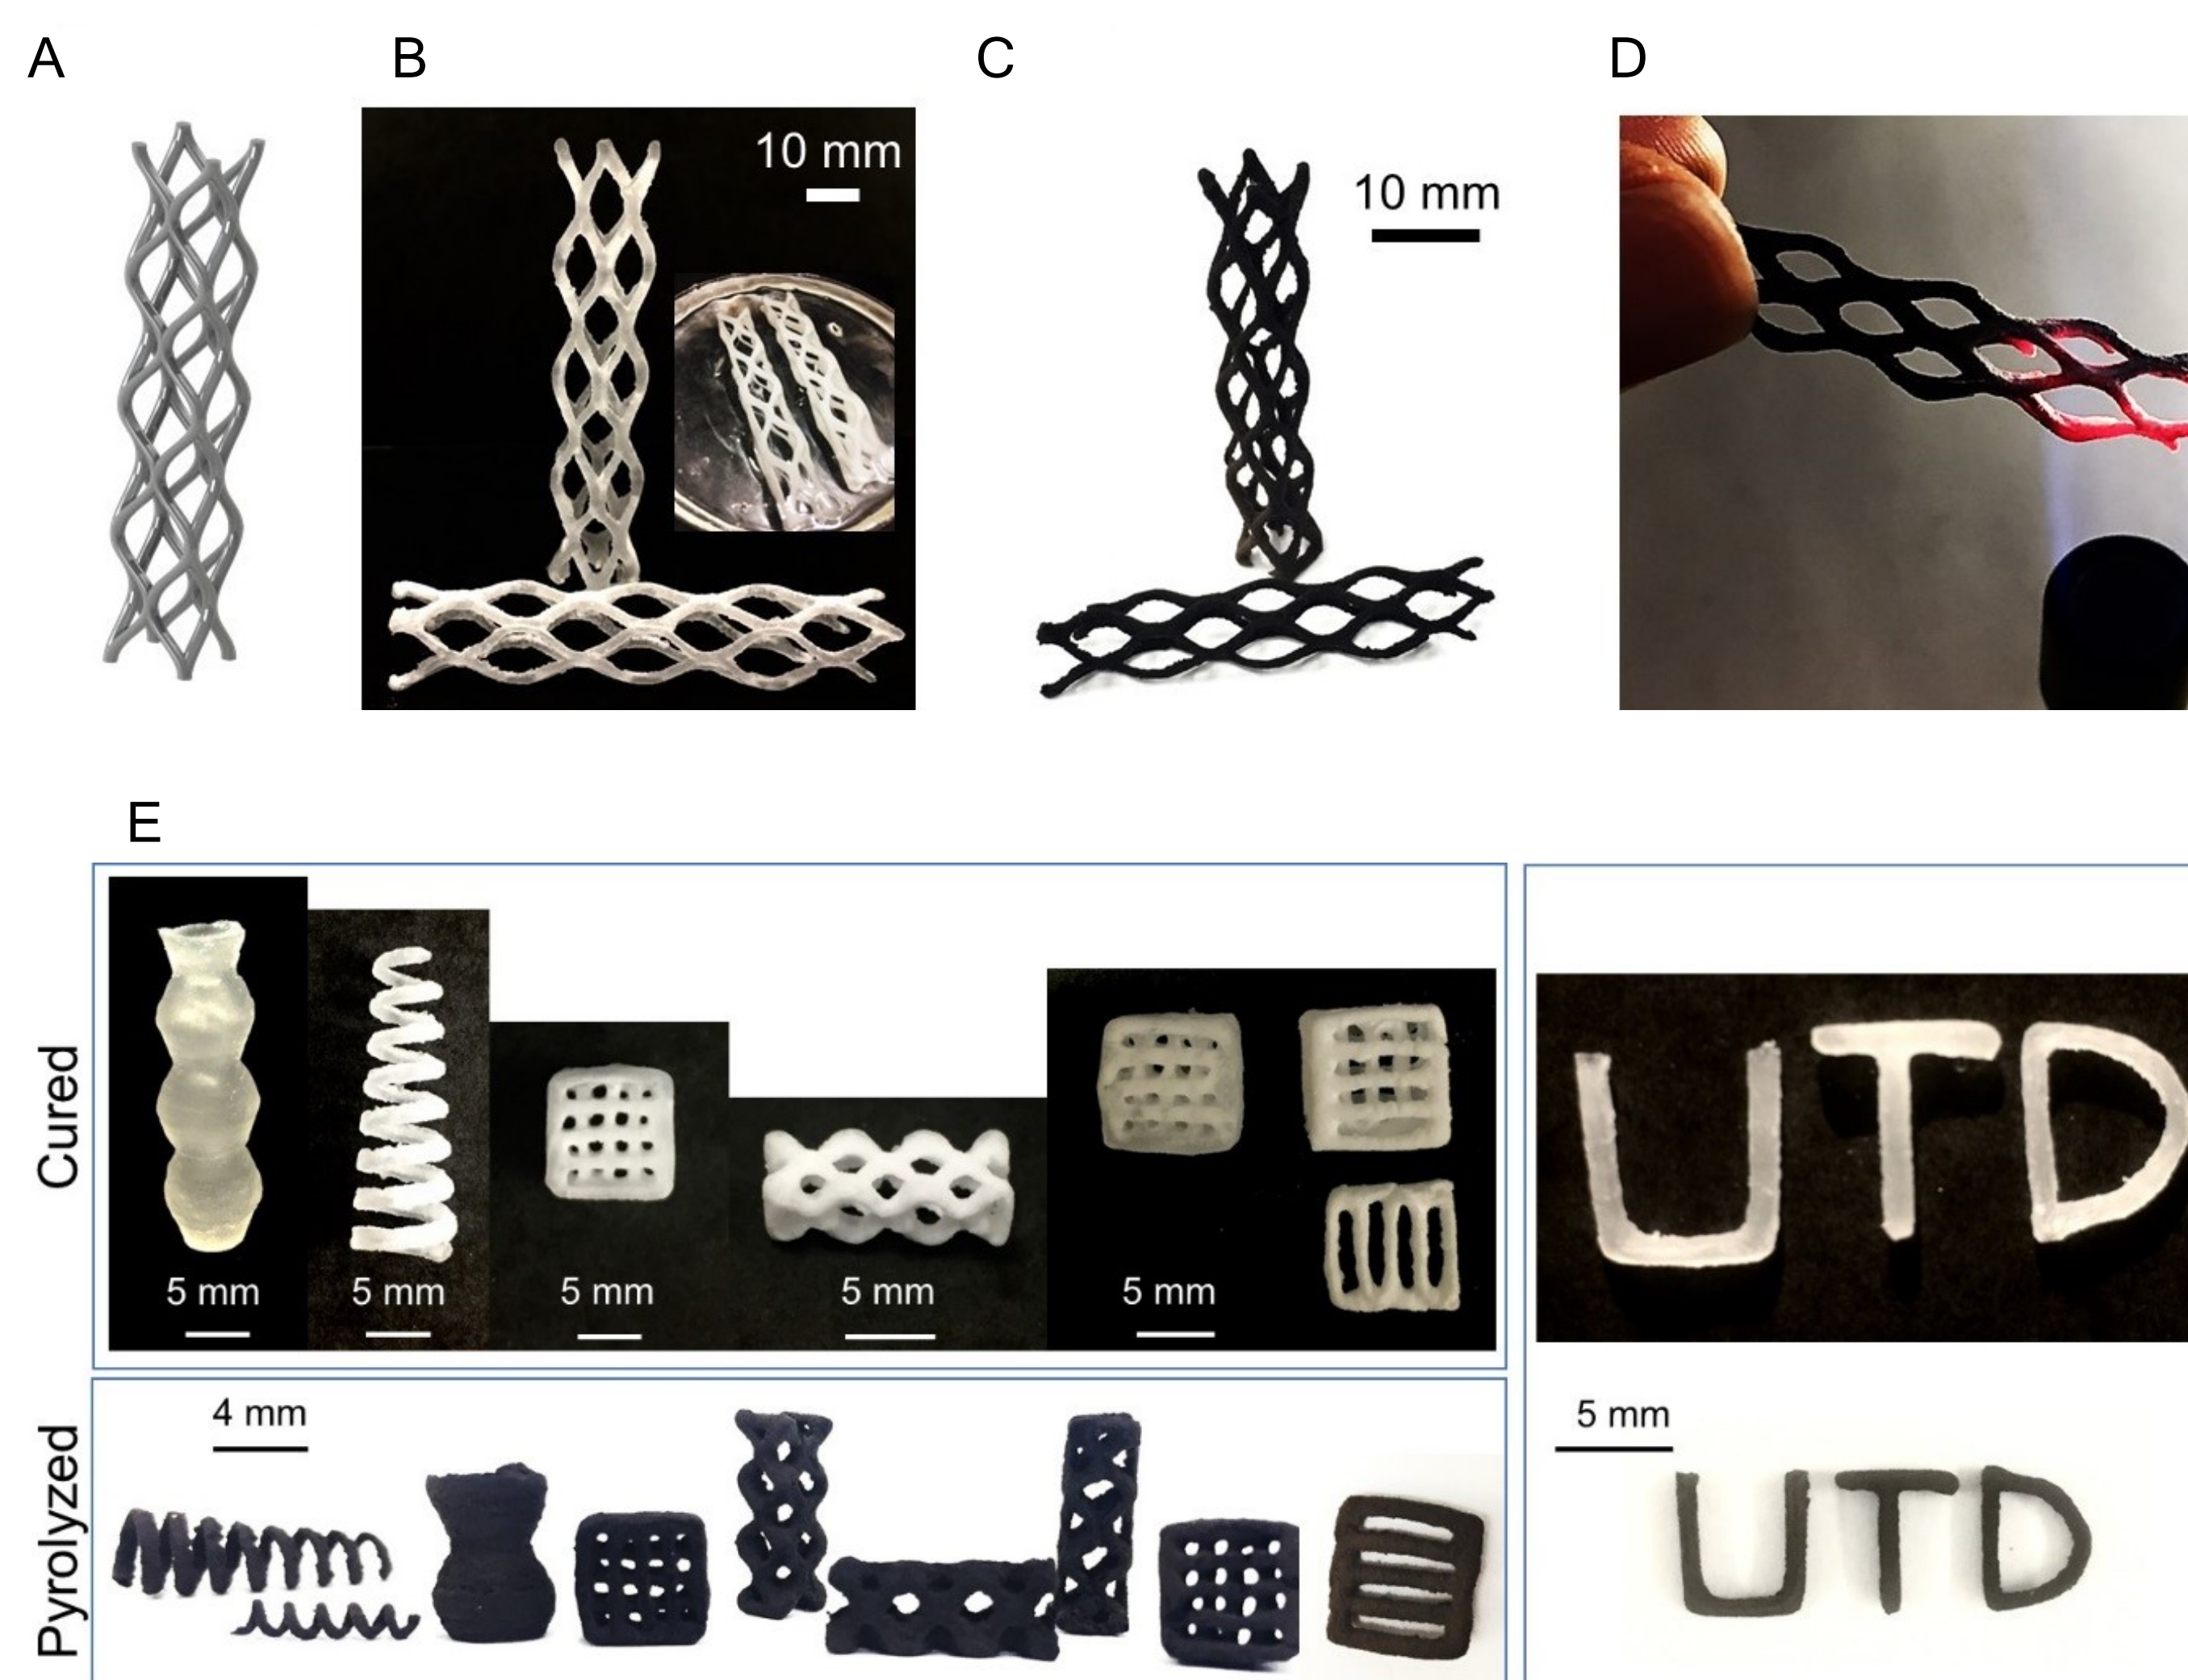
(A) – (C) CAD image and photos of a 3D printed truss-beam structure after curing and pyrolysis, respectively. (D) The final printed specimen shown over a flame. (E) Several geometries after curing and after pyrolysis. Printing duration for the parts ranged within ~ 8 – 115 seconds.
